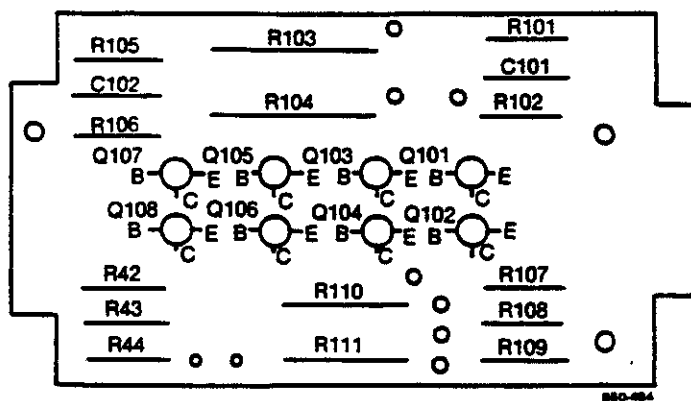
220/240 V - Printed Wiring Board Assembly (Triac Drive)
